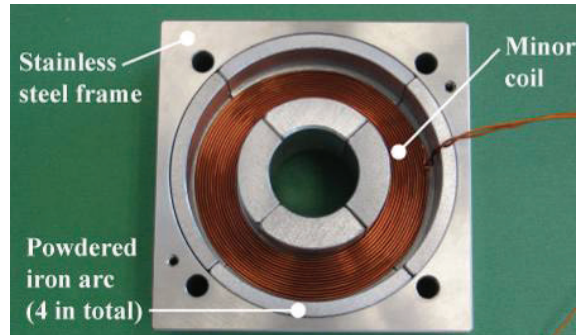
The layout of front and rear magnetic bearing assembly components.
